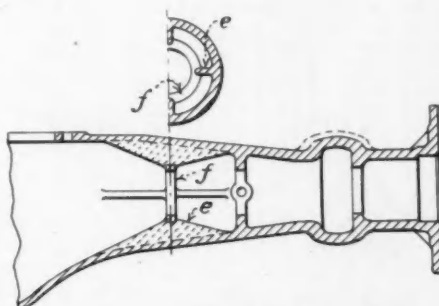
AXLE-HOUSING OF IMPROVED DESIGN
